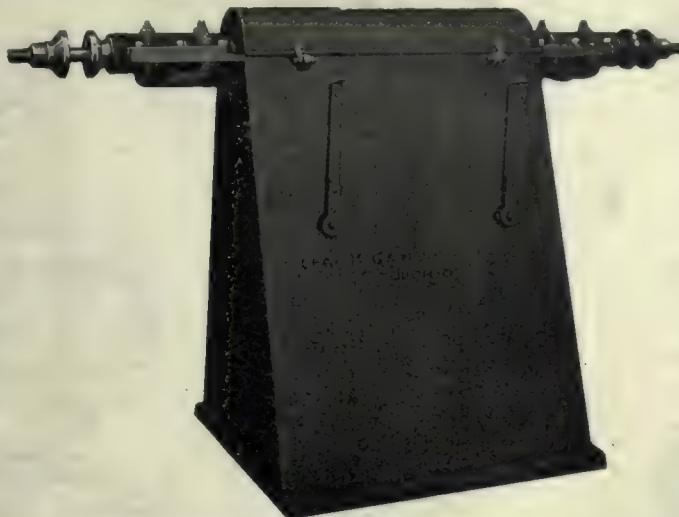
DOUBLE SPINDLE POLISHING LATHE WITH FLOOR DRIVE TO SPINDLES.
